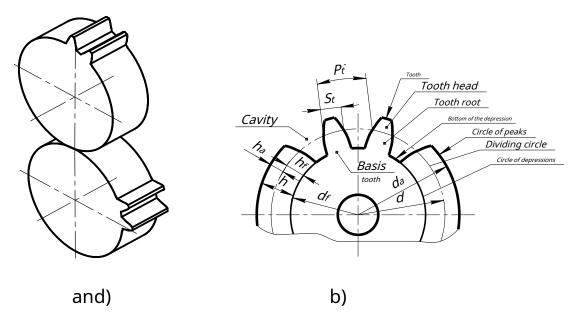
Geometric parameters of the involute gear (of involute toothed gear)
